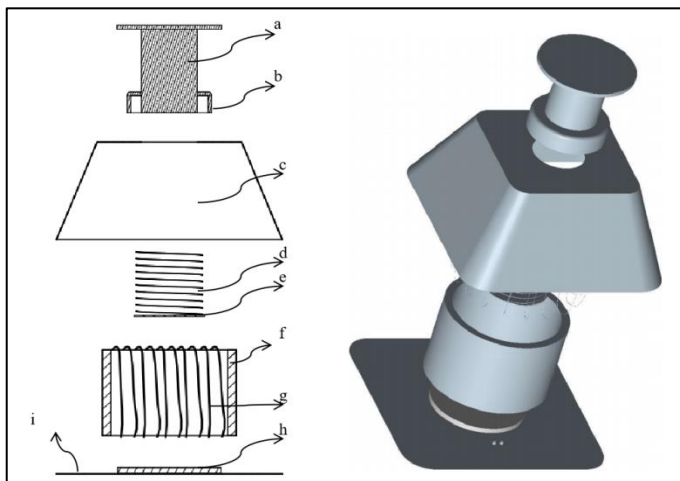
Keypad construction parts, (a) pressing post, (b) spring limit slot, (c) housing, (d) spring, (e) spring retaining spacer, (f) winding post, (g) coil, (h) force sensor, (i) coil terminal.
